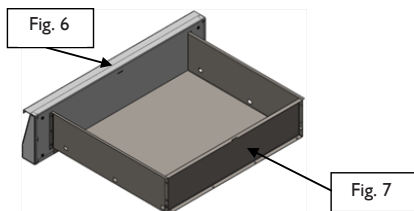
Large drawer (rear view) with marked position of GN bracket mounting elements
